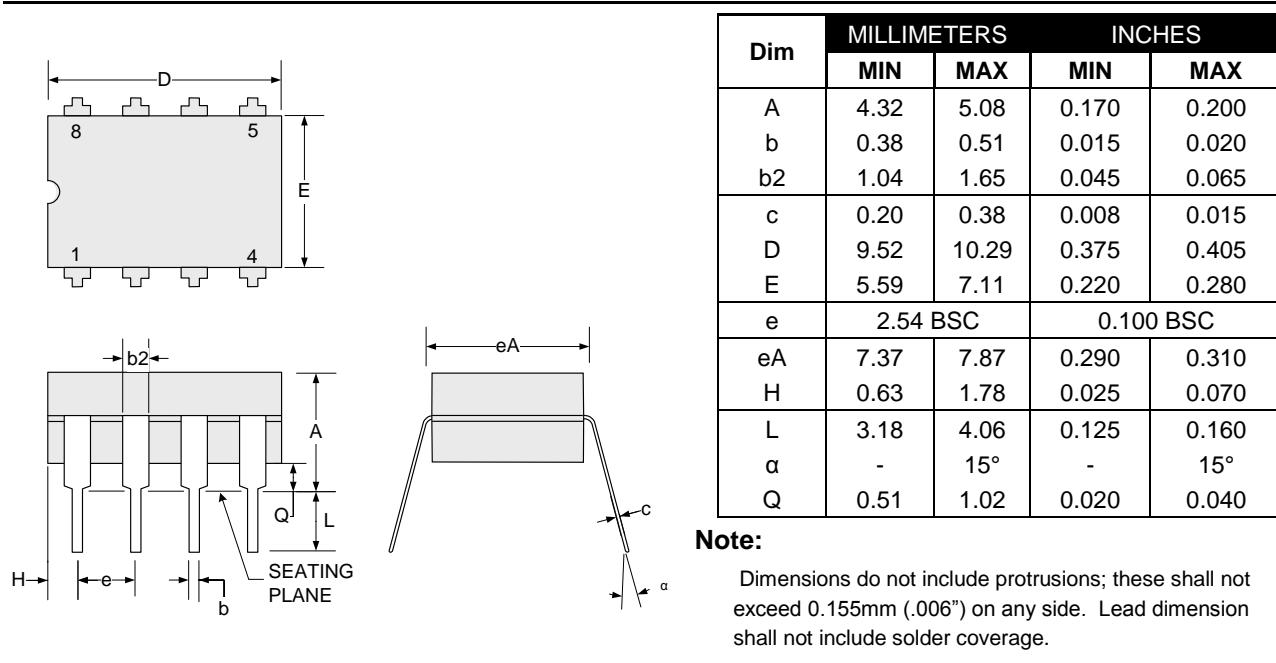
· Y 8-Pin CERDIP Package Dimensions
